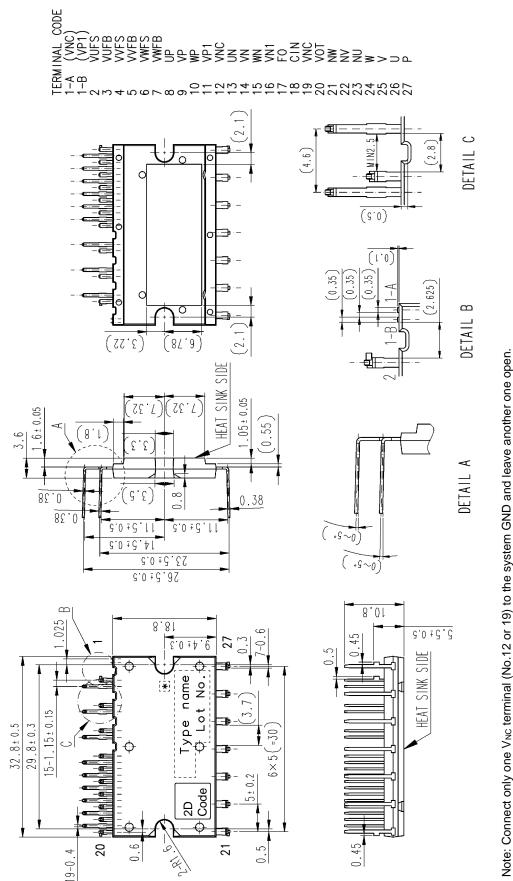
Package outline drawing for control signal zigzag type with normal terminal length (Dimension in mm)
